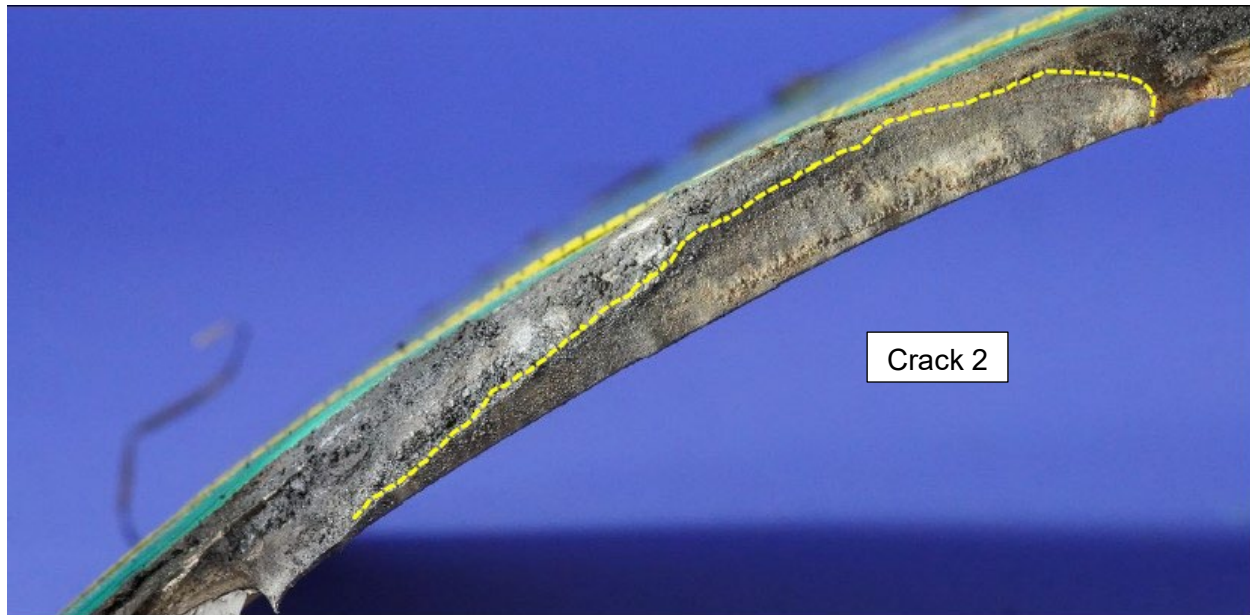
Magnified View of Crack 2 in GWD 13530 (G59B)
